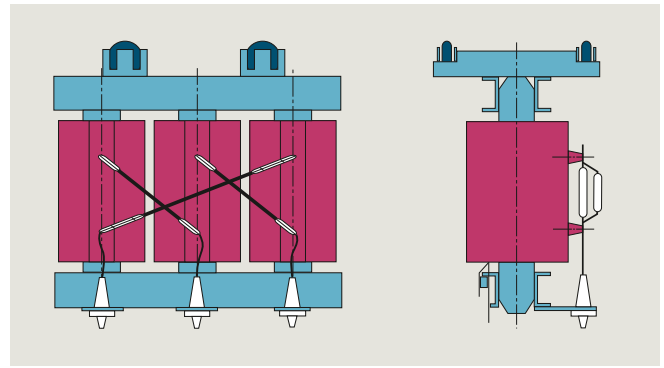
GEA FOL transformer with plug-type cable connections
